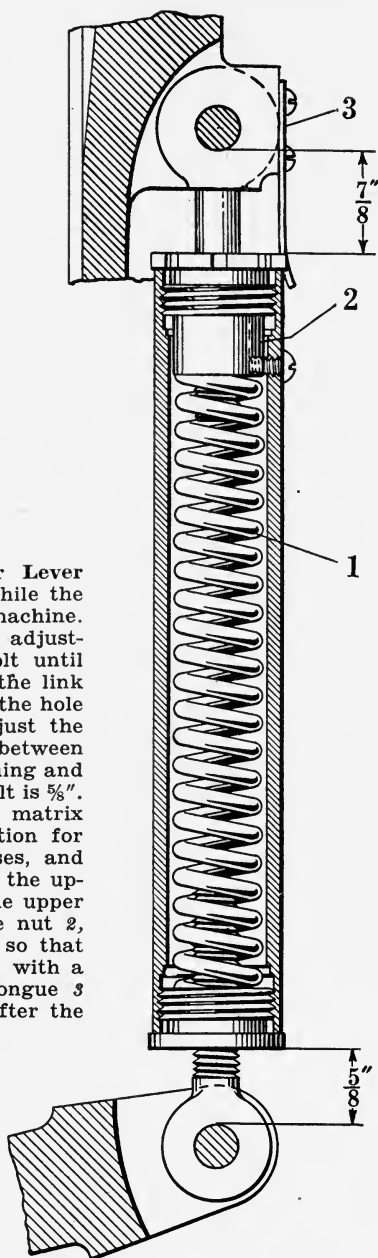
The First-Elevator Lever Link adjustments are made while the link is disconnected from the machine. These are called assembling adjustments. Turn the upper eyebolt until the space between the top of the link casing and the bottom edge of the hole in the bolt measures $\frac{7}{8}$ " ; adjust the lower eyebolt until the space between the lower edge of the link bushing and the upper edge of hole in eyebolt is $\frac{5}{8}$ ". Before the cast, in making matrix alignment, and again at position for transfer, the first elevator rises, and through the link presses up on the upper eyebolt passing through the upper link bushing screwed into the nut 2, bearing against the spring 1, so that the elevator comes to position with a cushion stroke. The spring tongue 3 holds the casing in position after the adjustment has been made.
